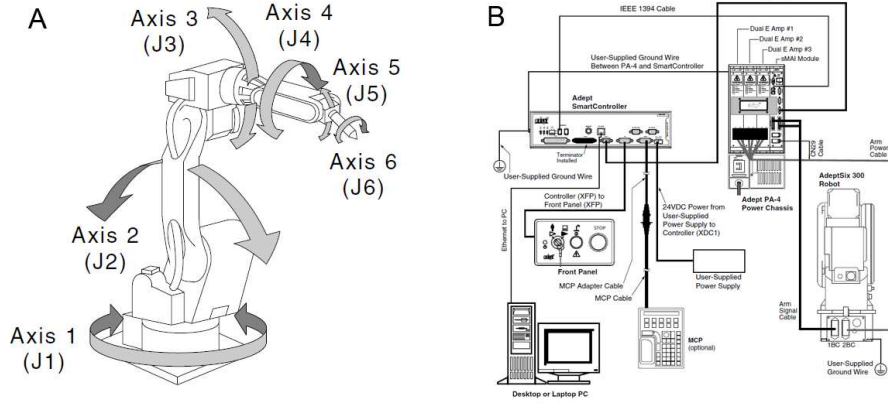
Adept six-300 industrial assembly robot. (A) Technical drawing of the robot with its six independently movable joints indicated. (B) Wiring plan of all system components. The robot has an external power supply, a manual control panel and a specialized smartController, which stores software and controls the robot in real time. Even though, programs and user commands are sent from a separate workstation.
